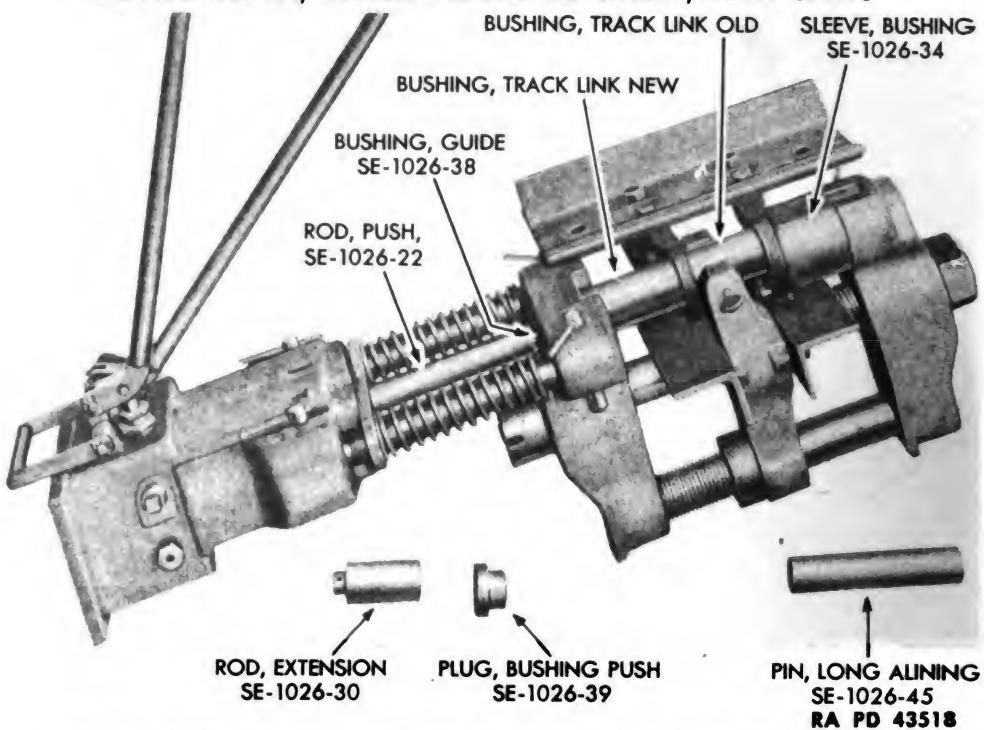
Pushing Old Bushing Out and New Bushing In,
